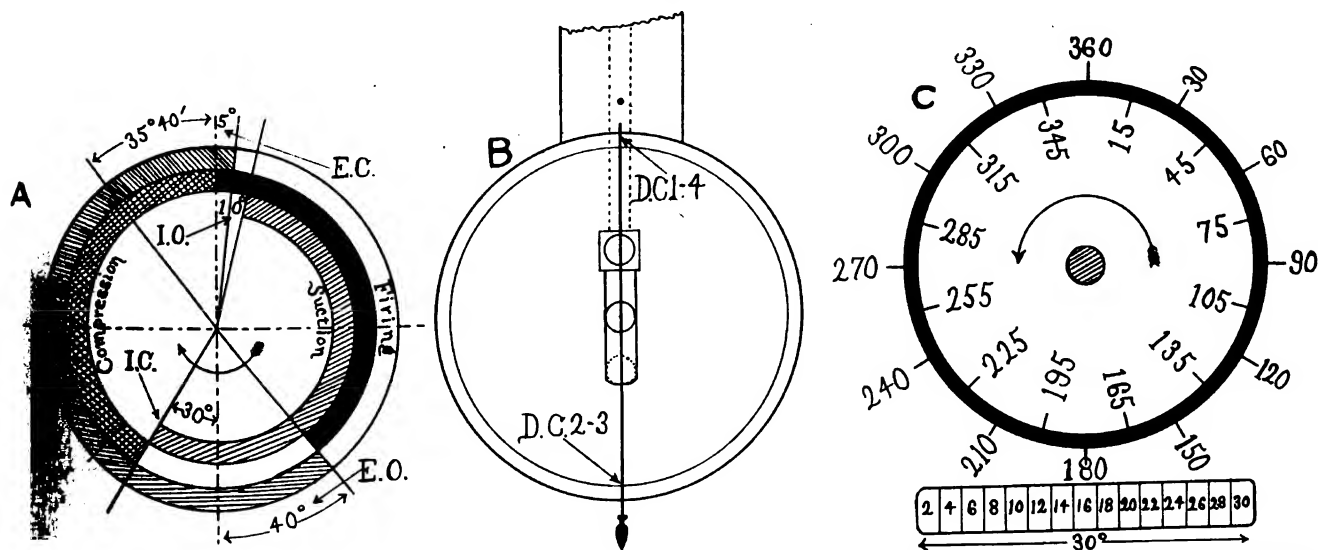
RETIMING MOTORS—A, DIAGRAM FOR MEDIUM SIZED ENGINE. B, OBTAINING THE TOP AND BOTTOM DEAD CENTERS WITH A PLUMB LINE. C, HOW TO LAY-OFF FLYWHEEL IN DEGREES
